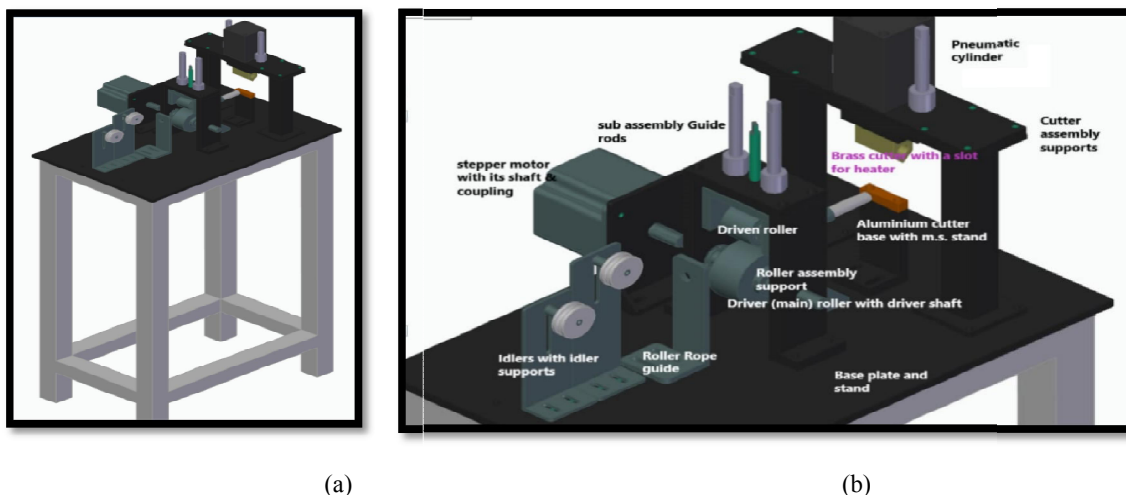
(a) whole Assembly of automated rope cutting machine and (b) its components
